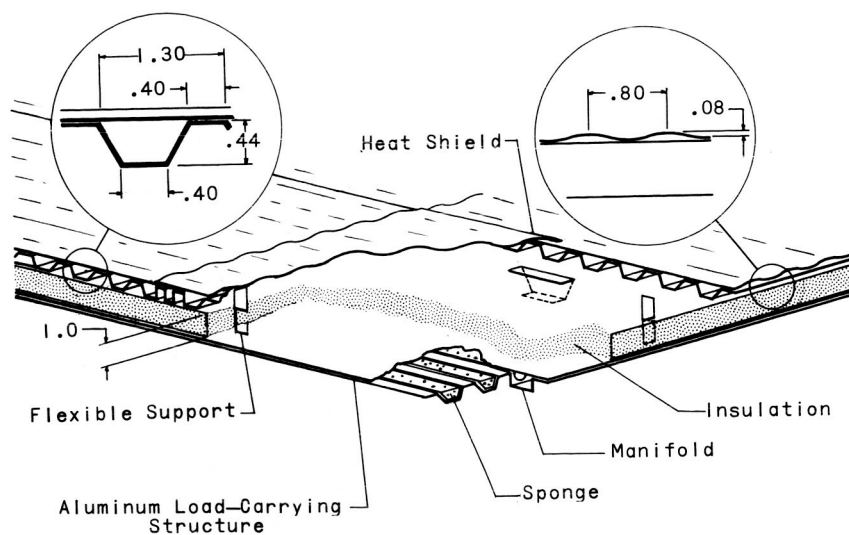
Details of heat-shield design, configuration C. All dimensions are in inches.
